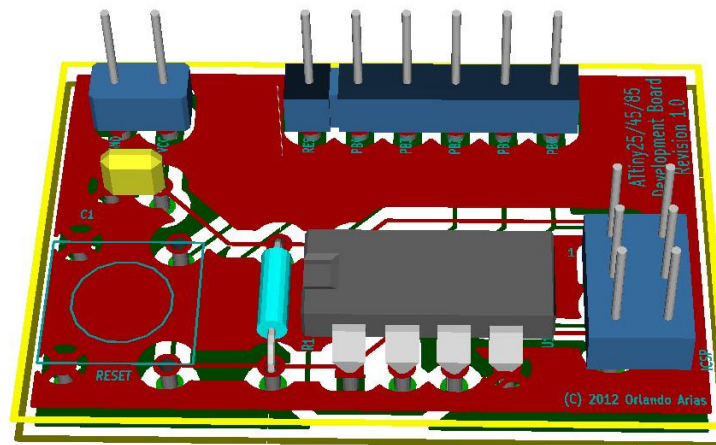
An ATtiny development board displayed in KiCad's 3D board view
